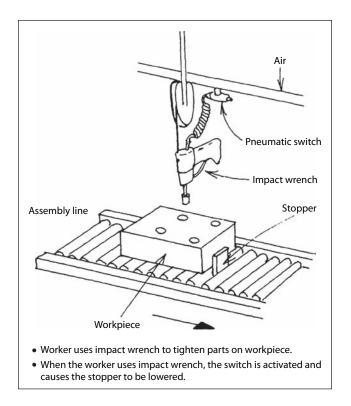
Extension of *Jidoka* to Prevent Omission of Workpiece Parts Tightening.
